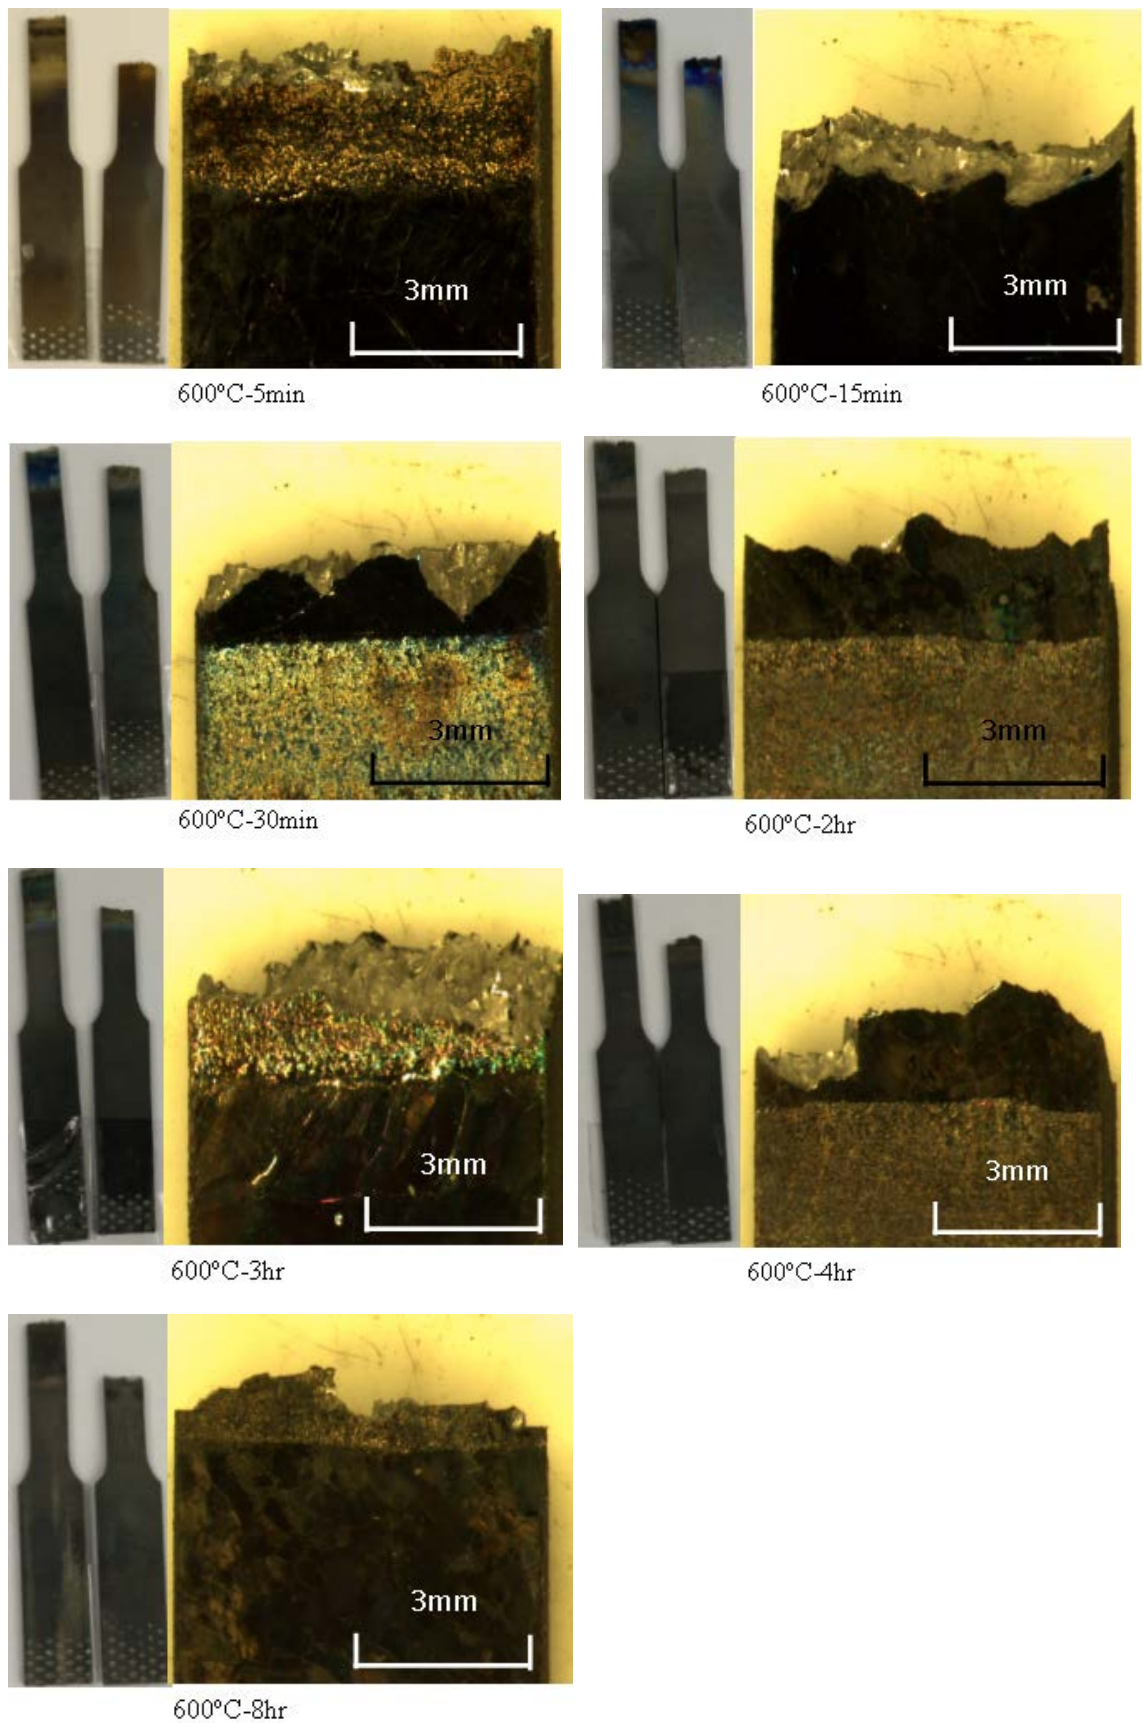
Macrographs of the broken test pieces and the fracture locations of specimens aged at 600°C after tensile test
